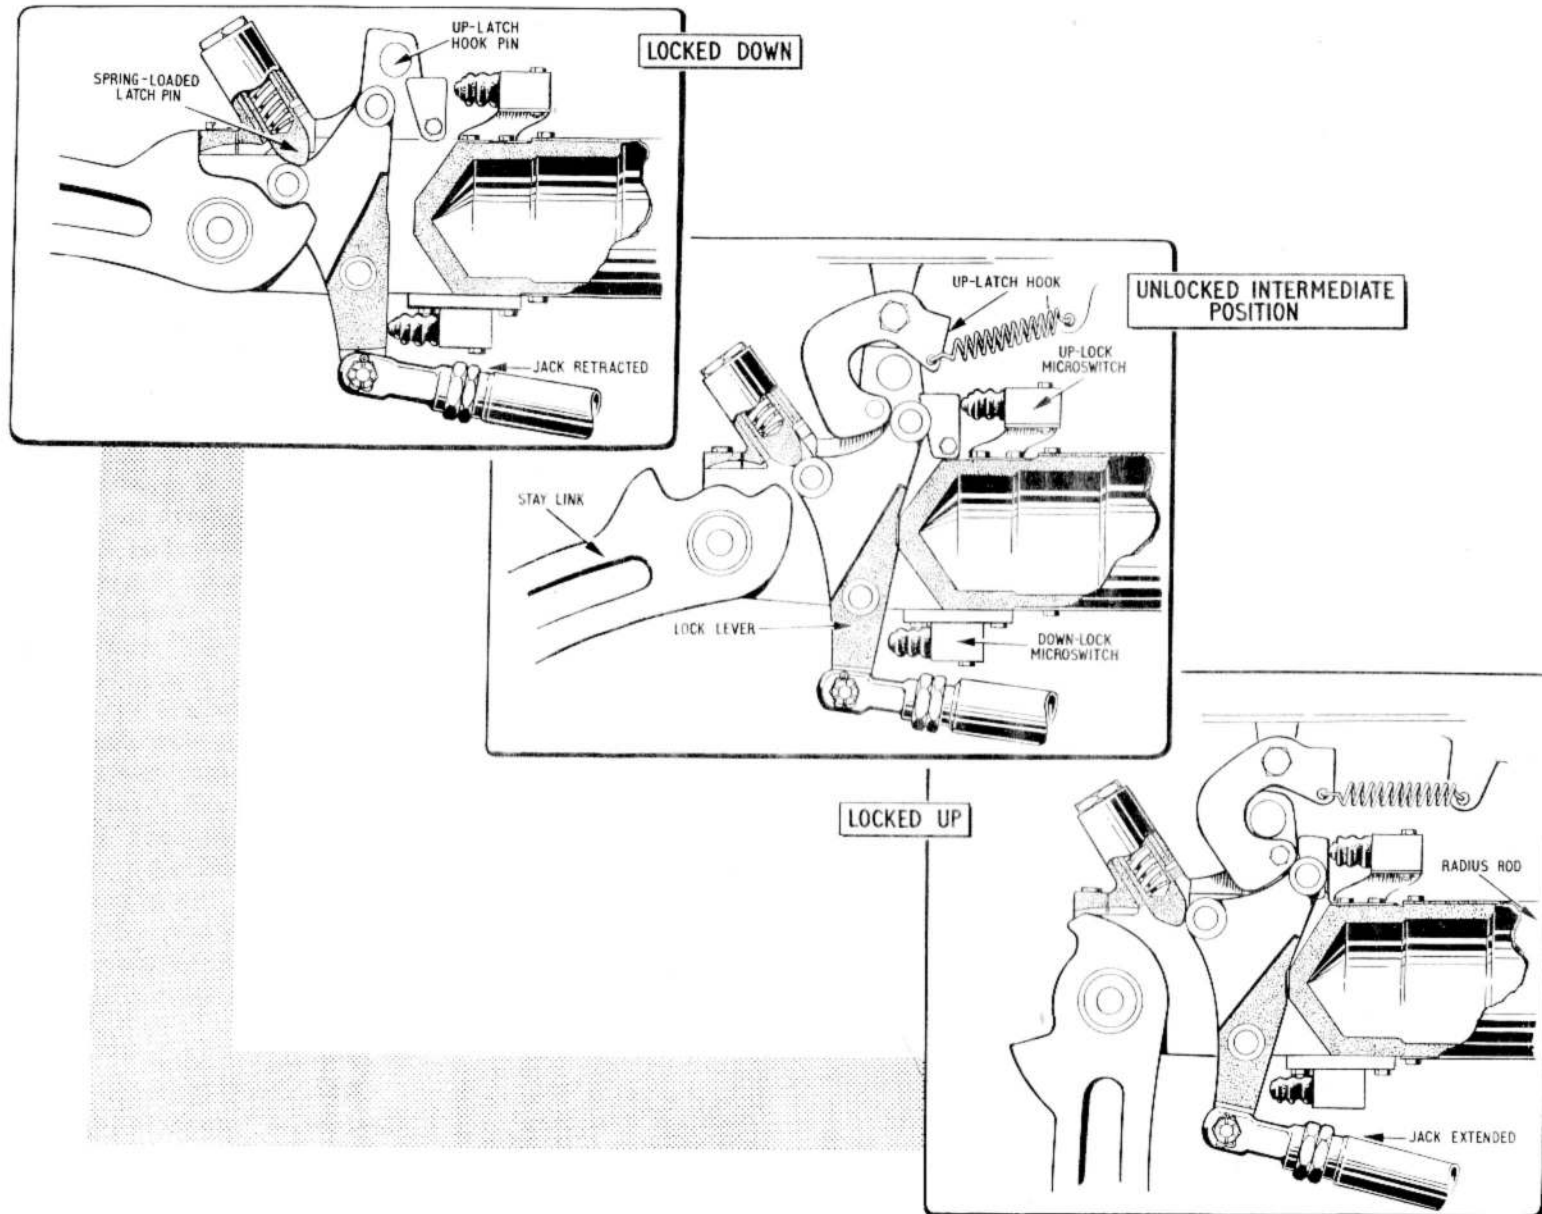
UNDERCARRIAGE LOCKING MECHANISM
